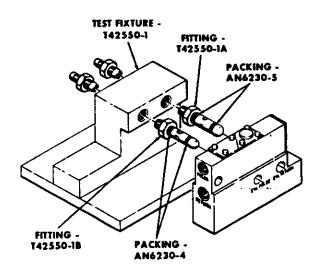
Installation of Valve in Test Fixture, T42550-1, With Fittings T42550-1A and T42550-1B
